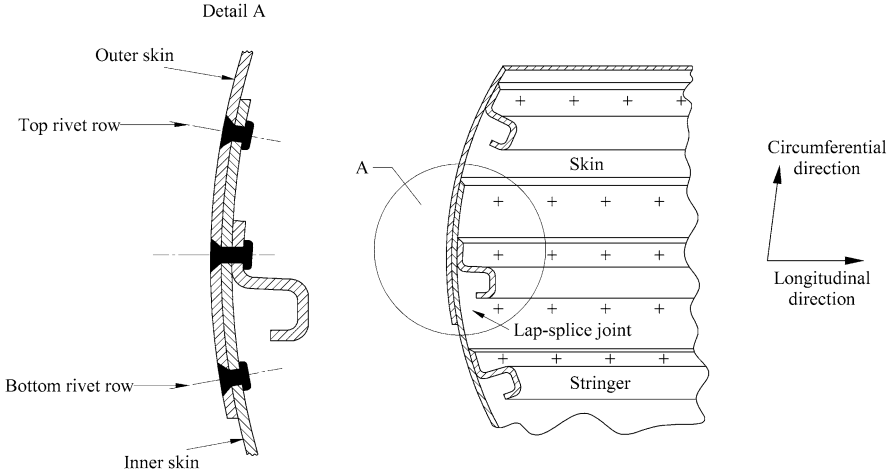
Typical fuselage longitudinal riveted lap splice joint
